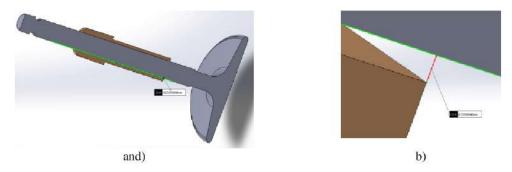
The gap between the valve stem and the guide: a) longitudinal section; b) enlarged view of the Solid model
